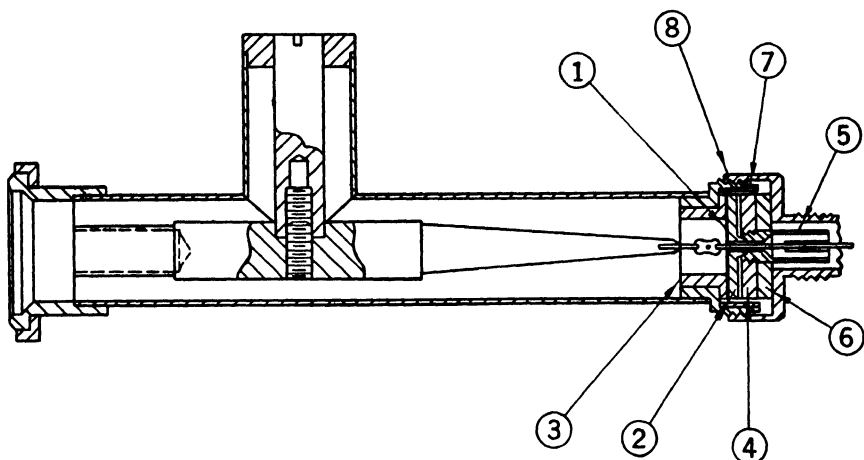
Drawing of a coaxial-line untuned thermistor mount for 10-cm band.
